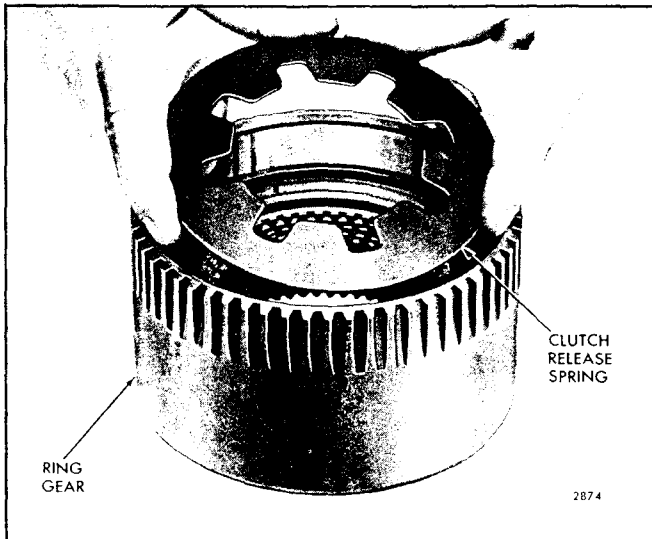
Installing Forward Clutch Release Spring in Ring Gear
